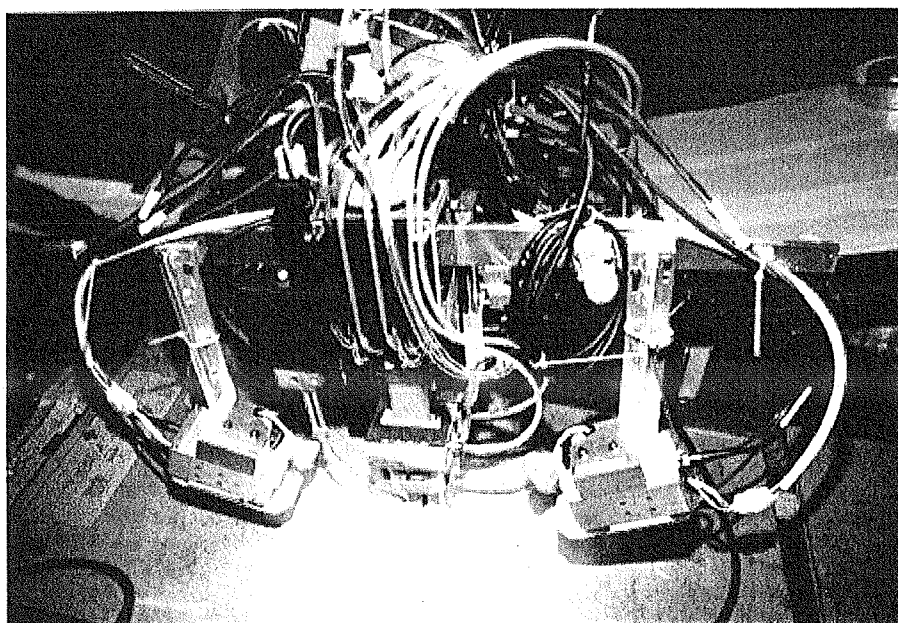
Configuration of Automatic TIG Welding Head for VV welding test
